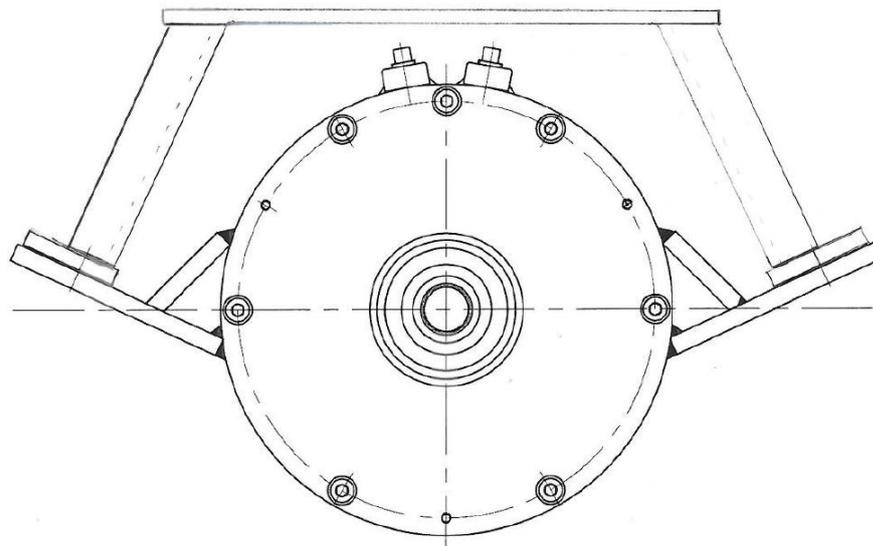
Bridge with channel sections for mounting components above the motor in the REVjet
